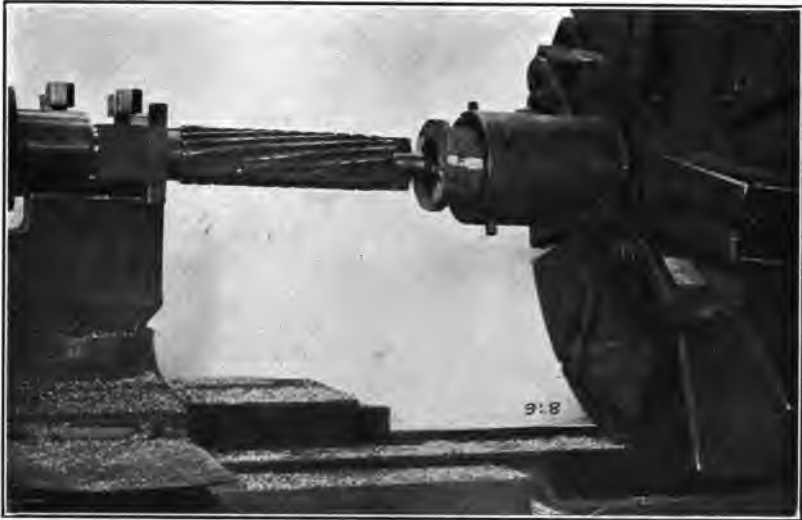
BORING TOOL AND REAMER FOR FINISHING EXTENDED PISTON-ROD BUSHINGS. THIS TOOL SUPPLANTED THE OLD BORING TOOL USED FOR THIS PURPOSE, DOING THE WORK MORE ACCURATELY AND CHEAPLY. DESIGN OF SPECIAL APPRENTICE.
